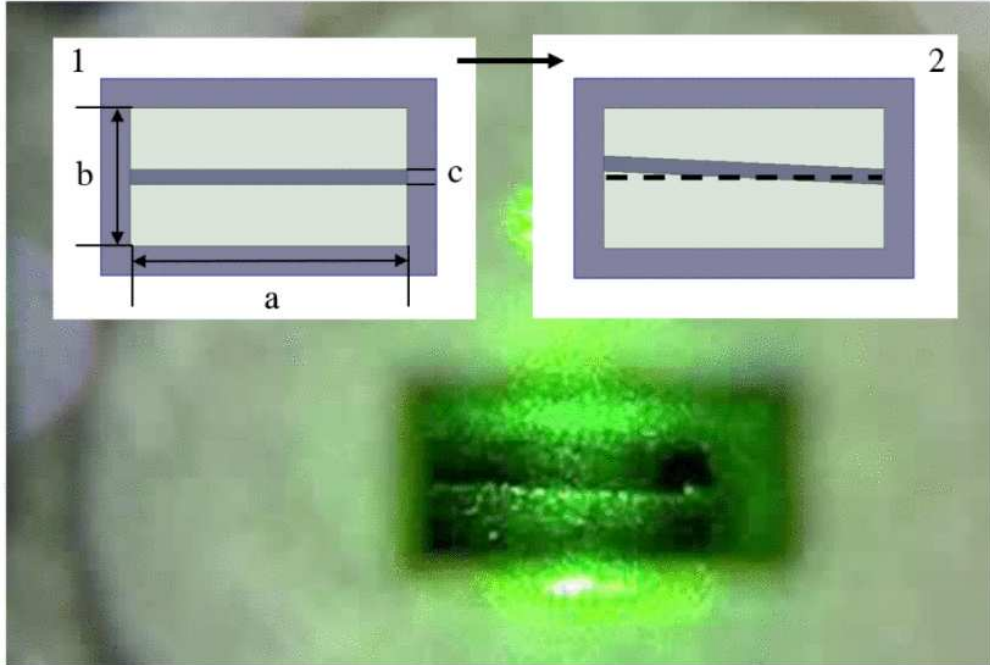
Waveguides fabricated utilizing new machining methods to realize small components.
